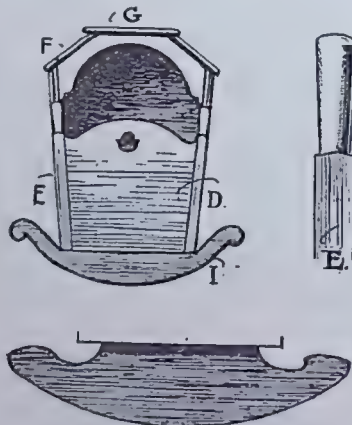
ELEVATION SHOWING CANOPY; ALSO ENLARGED DETAILS.
